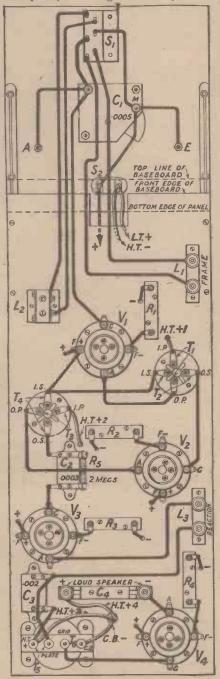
This drawing, which shows the panel and baseboard in the same plane, should be used in conjunction with the verbal wiring instructions.
